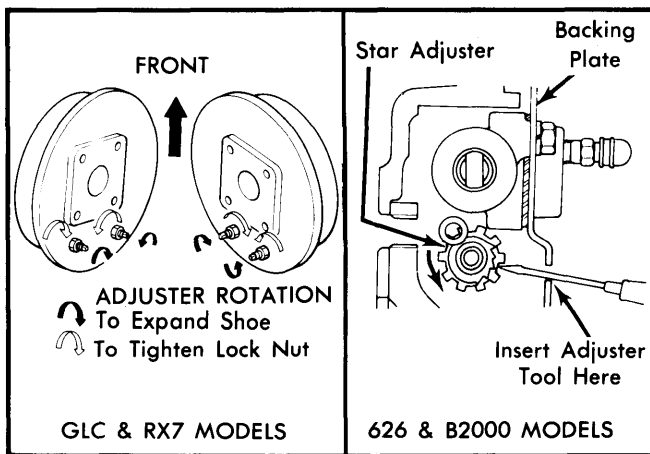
Rear Brake Shoe-to-Drum Adjustment
